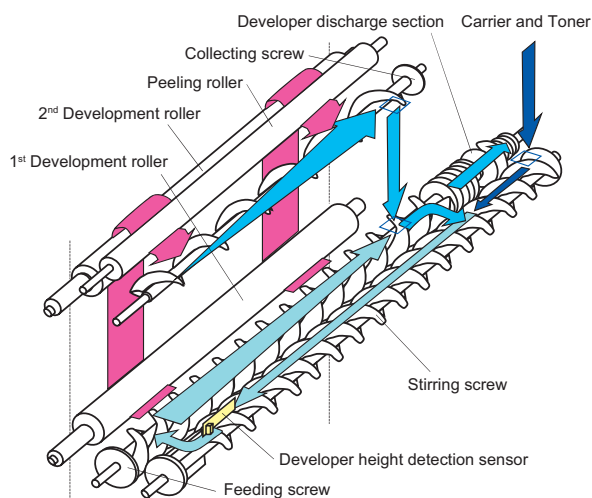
Exploded view of the developing unit showing internal flow of developer.
